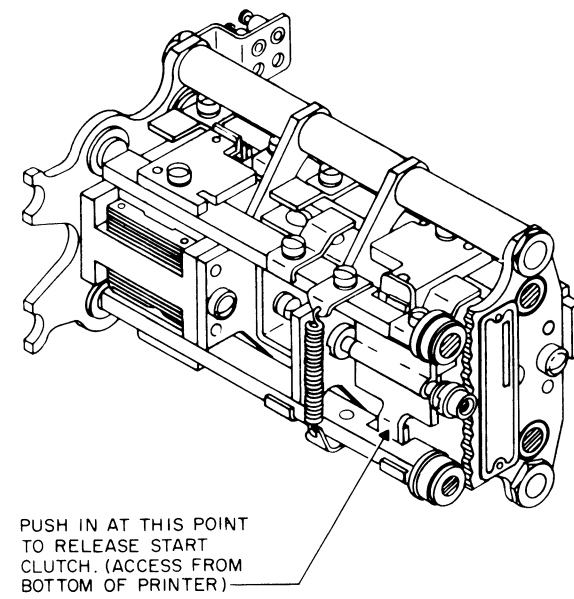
Start Clutch Release Mechanism, Exploded View
